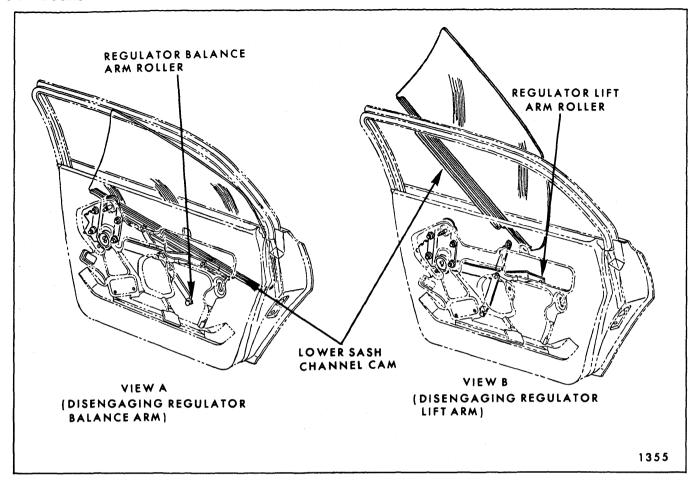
Rear Door Window Removal - "A" Closed Styles
